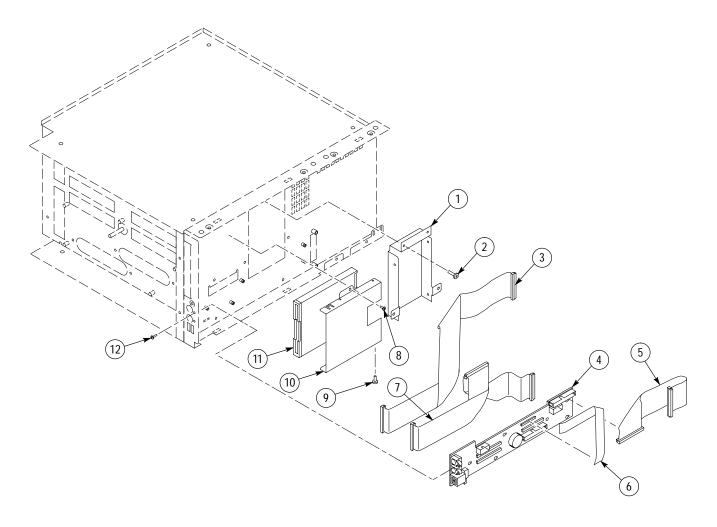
Floppy disk drive, front panel interface board, and related cables
